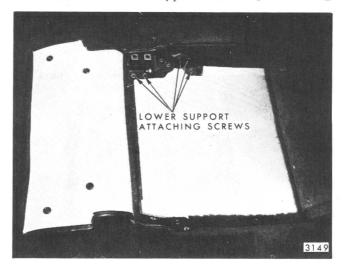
Auxiliary Seat Lower Support - Cadillac Limousine Styles
